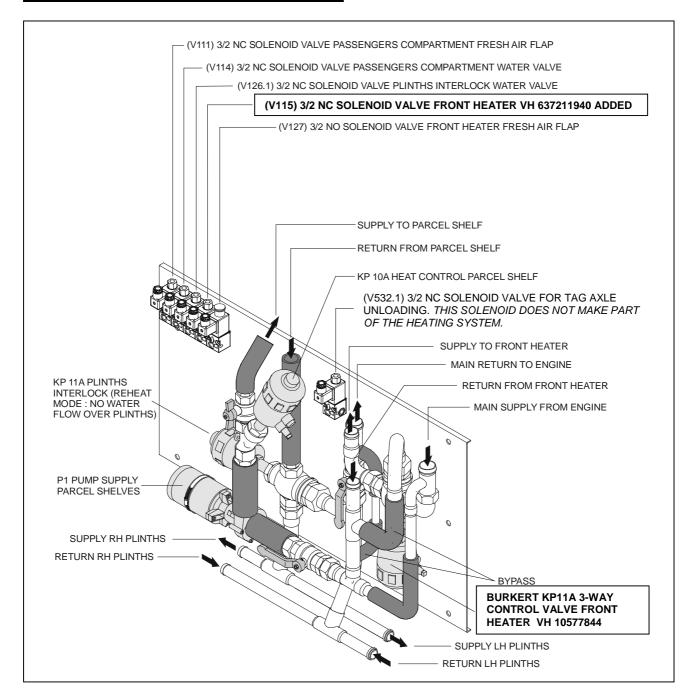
New heating valve and pump panel located at the rear of the luggage compartment. The pneumatically operated Burkert valve replaces the electrically driven Sonna valve. Note the modified tubing and added solenoid valve to accept the new valve.
